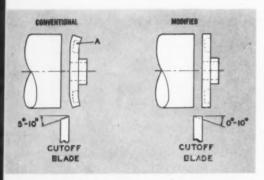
Sketch shows how front relief angle of tool was changed to prevent distortion of part when subjected to cut-off operation.
